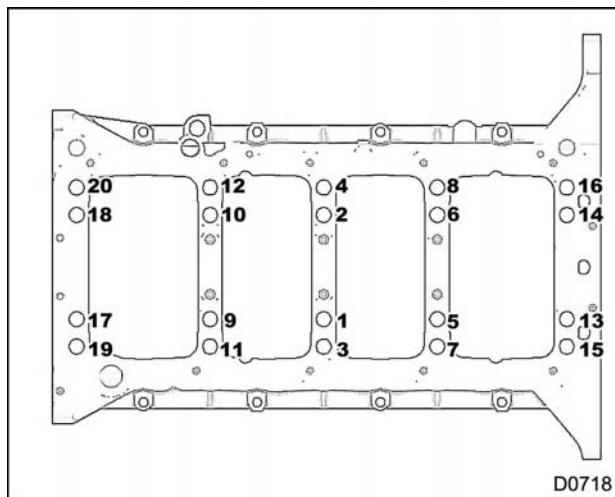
Tightening sequence for lower crankcase main bearing bolts
